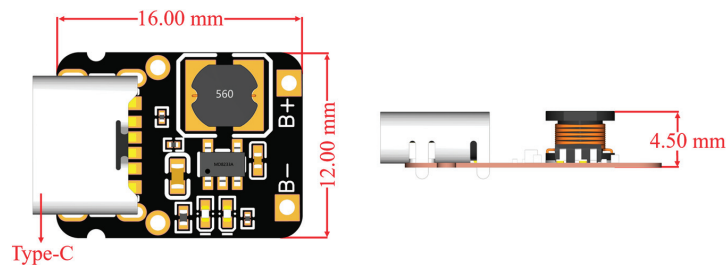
Compact integrated charging and discharging module dimensions: 16.00 mm × 12.00 mm × 2.60 mm.
